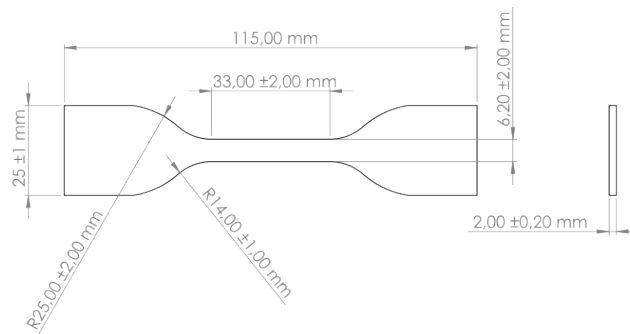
Test specimen type 1 shape and dimensions according to ISO37.
